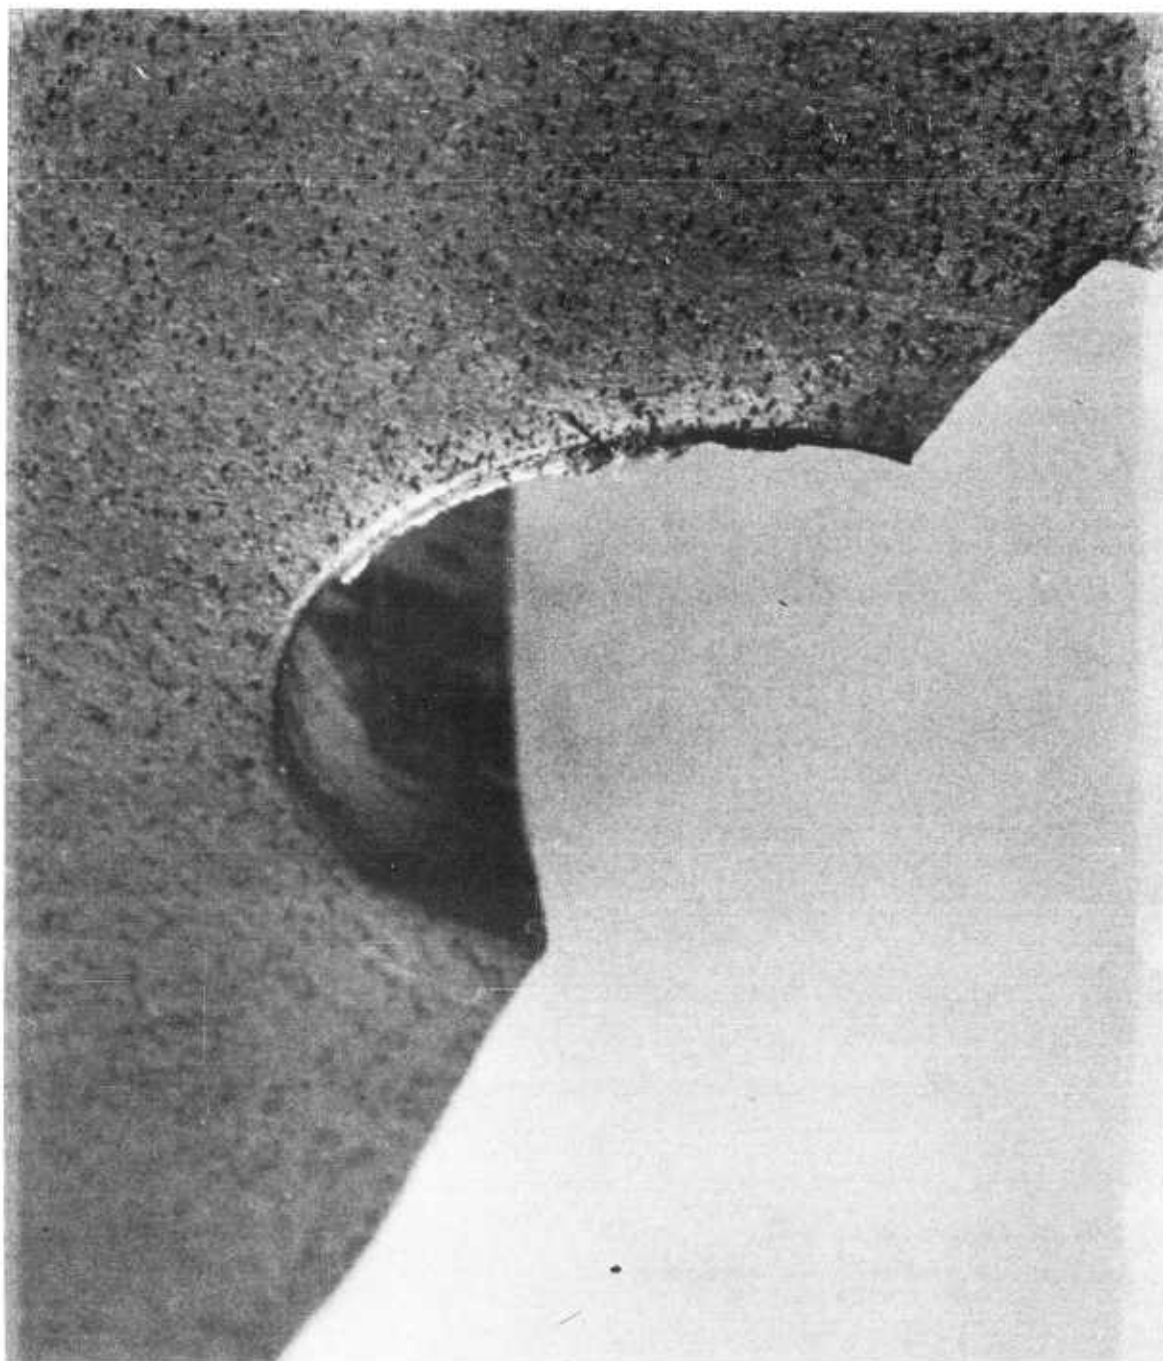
Rear Spar Fracture Area -- View of Crack in Burr
